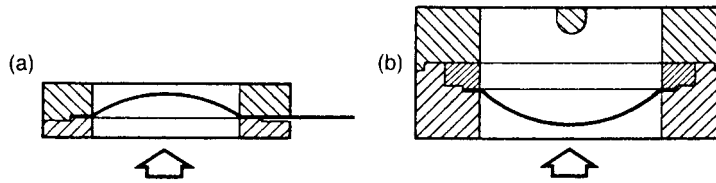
Some typical bursting discs: (a) conventional bursting disc; and (b) reverse buckling bursting disc
